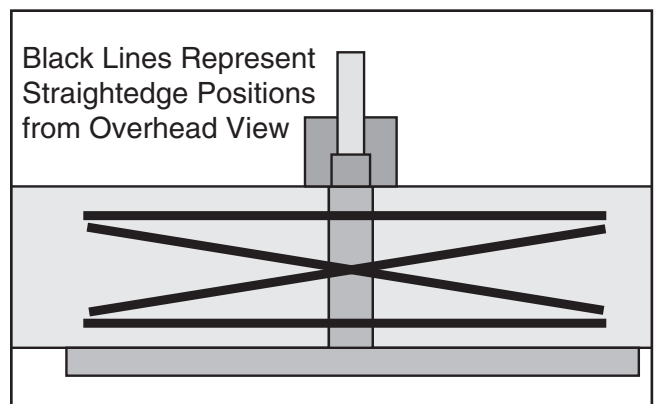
Straightedge positions for checking infeed/outfeed table parallelism.
